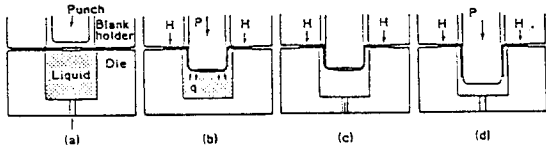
Sequence of operations for the hydraulic counter-pressure forming of a tube with a flange from a blank with a hole: (a), (b) hydraulic counter-pressure deep drawing; (c), (d) drifting.
